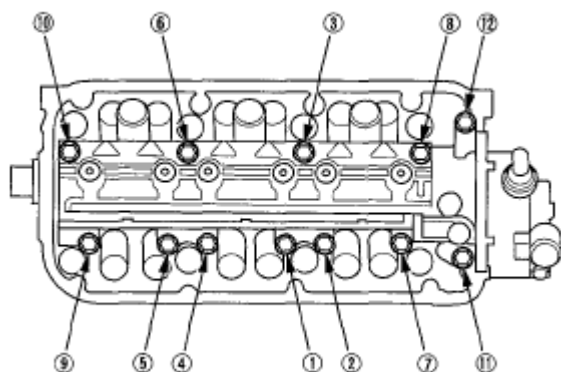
Identifying Tightening Sequence Of Rocker Arm Bolts - Rear
